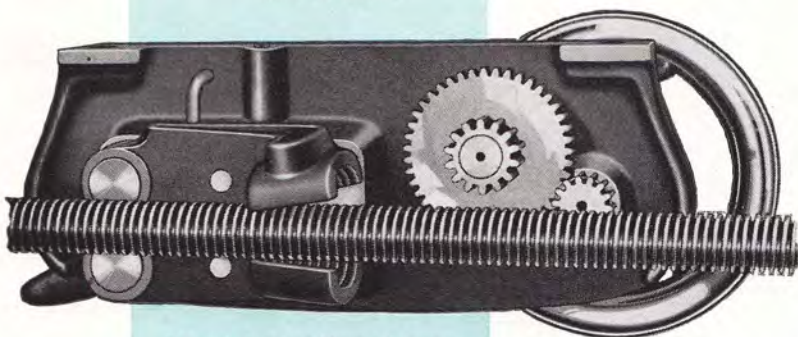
Interior View of Apron Showing Half-nuts and Gearing.
